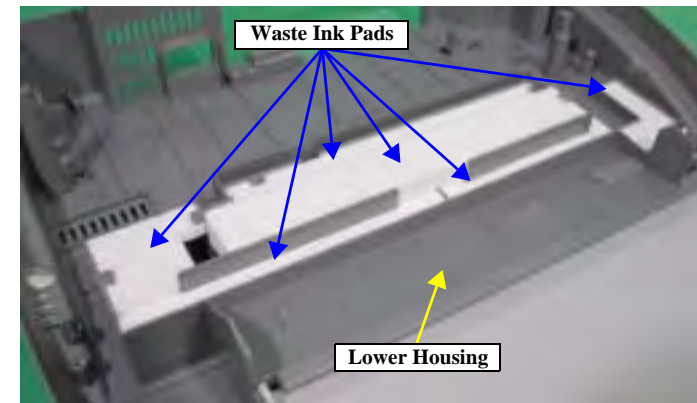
Waste Ink Pads/Lower Housing Removal
